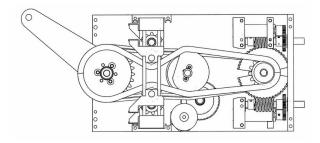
CAD drawing of the prototype FlexCVA. In this version, the worm gear is split with the top half connected to the front sprocket and lower half connected to the back sprocket. Belt tensioners with linear Hall Effect sensors send belt position to the controlling electronics. Springs in the tensioners automatically reduce the drive ratio as the load increases.
